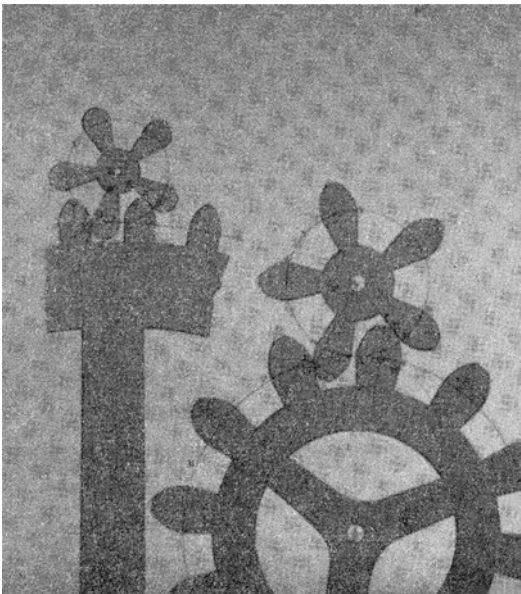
Examples of epicyclic gear drives using a 5-tooth pinion. (Courtesy of MIT Press, Cambridge, Massachusetts.)
